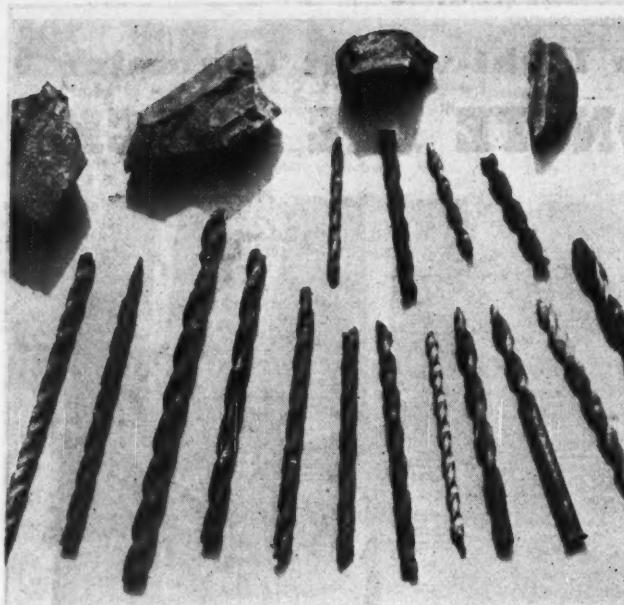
Broken Drills Picked Up from around the Blasting Area. The Large Pieces are Sections of a Core Drill Bit That Was Blown Out by Using Several Shots
